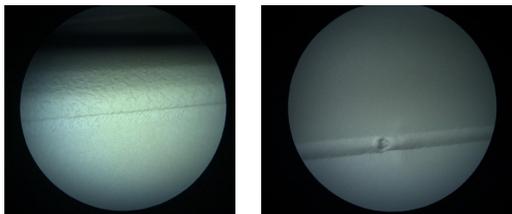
Inside view of the twin axis cavity #1 after coating using the borescope. The right image shows the coated weld defect.
